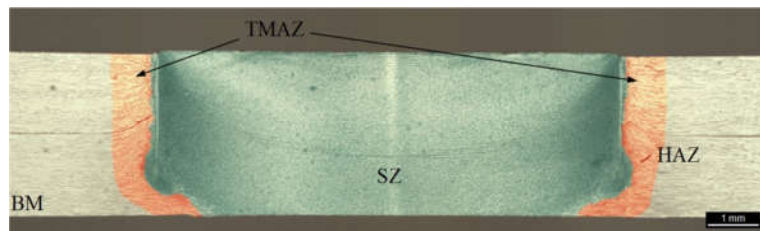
Cross-section of a representative weld produced by RFSSW indicating the stir zone (SZ), thermo-mechanically affected zone (TMAZ), heat affected zone (HAZ) and base material (BM)
